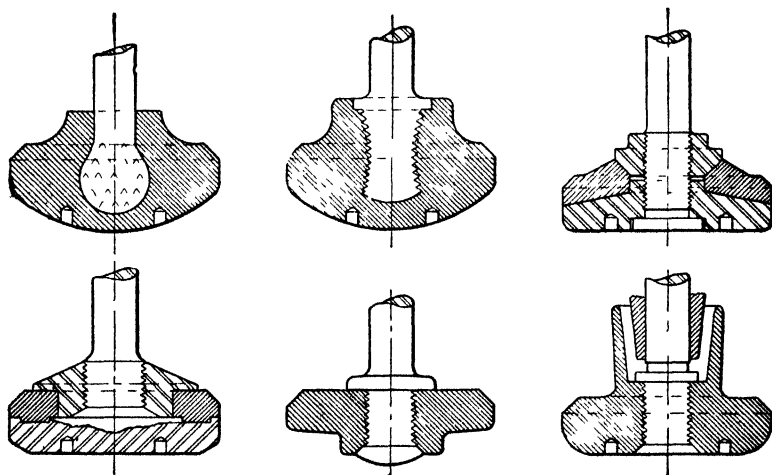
Various Forms of Exhaust Valves and Methods of Securing the Cast Iron Heads to Steel Valve Stems
